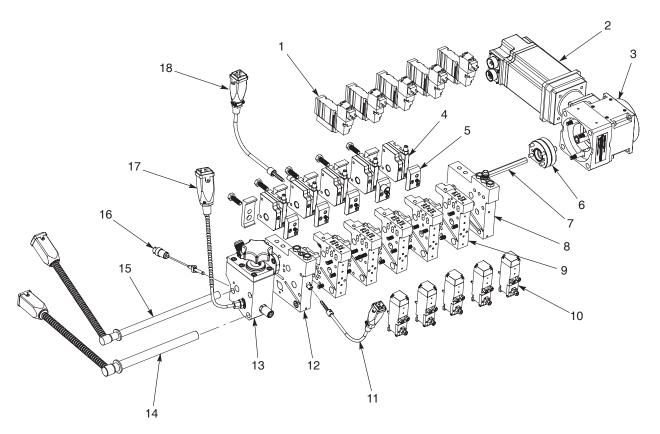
Key parts of a Universal slice applicator (five-slice applicator with right-angle drive shown)
